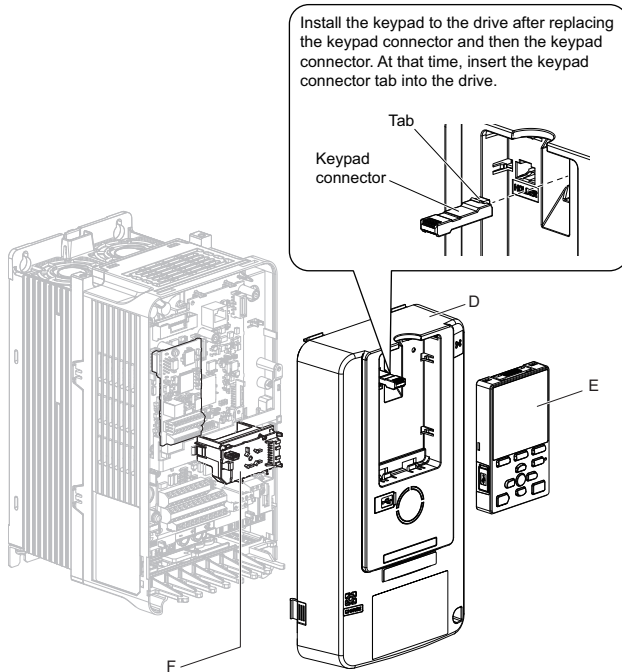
Replace the LED Status Ring Board, Front Cover, and Keypad
